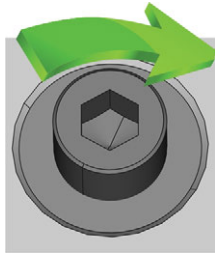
SCREWING DOWN THE SCREW TO IMMOBILIZE THE BLOCK
